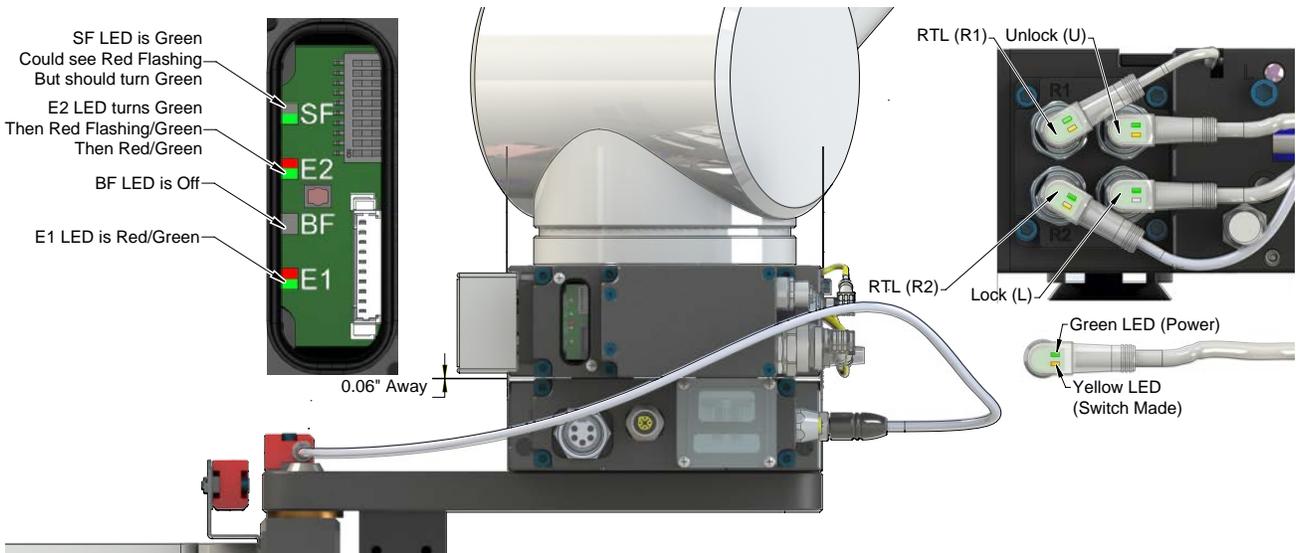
Master Moves into Tool and is parallel within 0.06” to 0.15”
